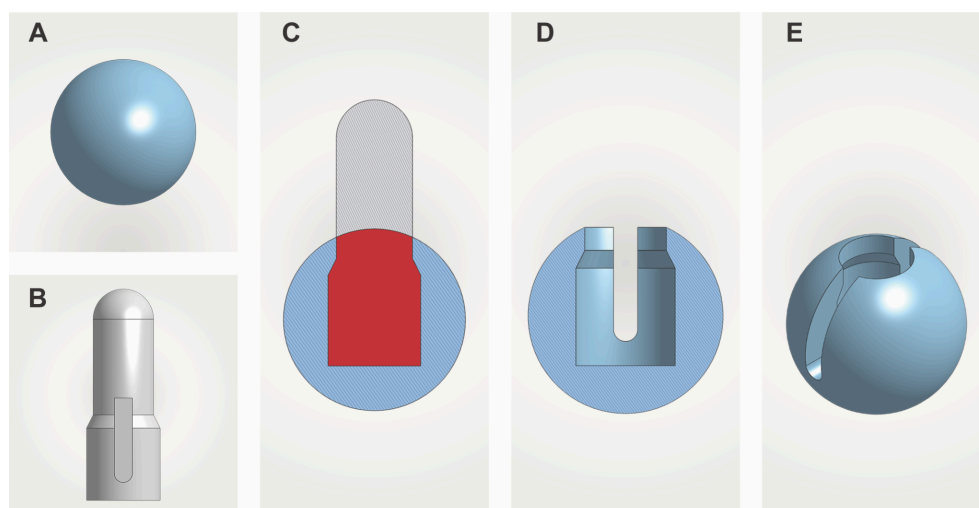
Method for using a cutting tool to create a joint feature. Pin socket is shown as an example. (A) Spherical atom part to which a joint will be added. This is the target. (B) Previously designed pin socket part. This is the cutting tool. (C) Cross-section showing the overlap of the two parts once the cutting tool is instantiated on the atom. (D) Cross-section of the final part after cutting tool removes the overlapping area. (E) Isometric view of final atom part with socket joint cut out of it.
